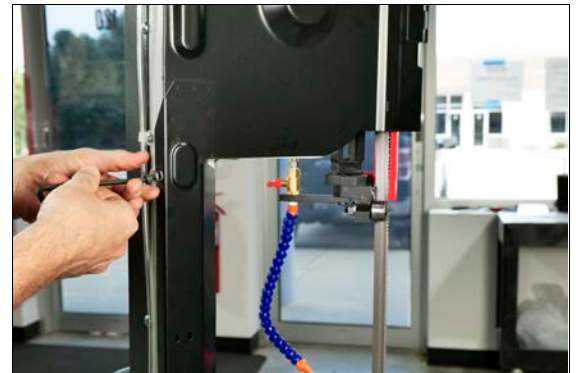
Removing the screws securing the blade cover to the bandsaw.
